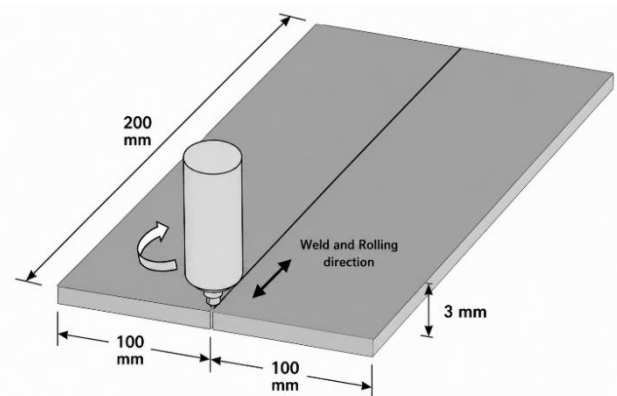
Schematic illustration of friction stir welding (FSW) by pin tool, showing a 200 mm × 200 mm workpiece with a thickness of 3 mm and the welding direction along the center line
